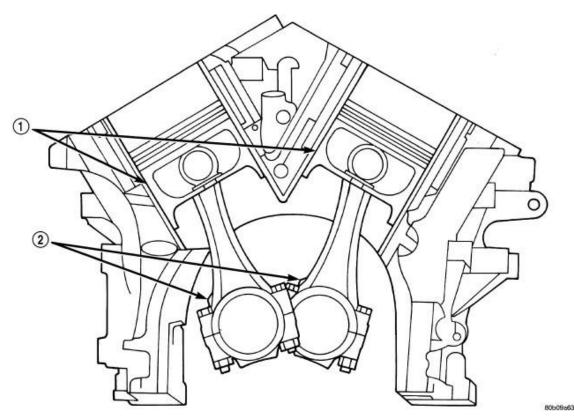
Piston & Connecting Rod Positioning (Front View of Engine)
